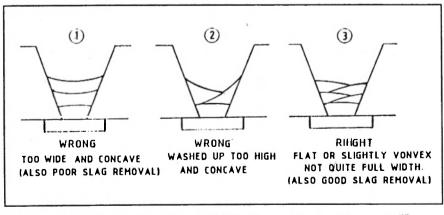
Effect of weld bead shape on solidification cracking in multipass weld (17)
